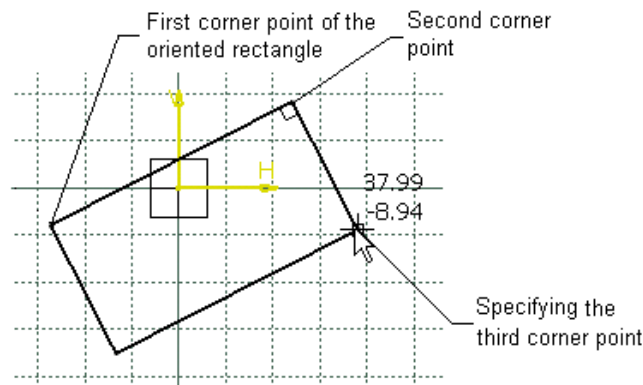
Oriented rectangle being drawn by specifying the corner points
